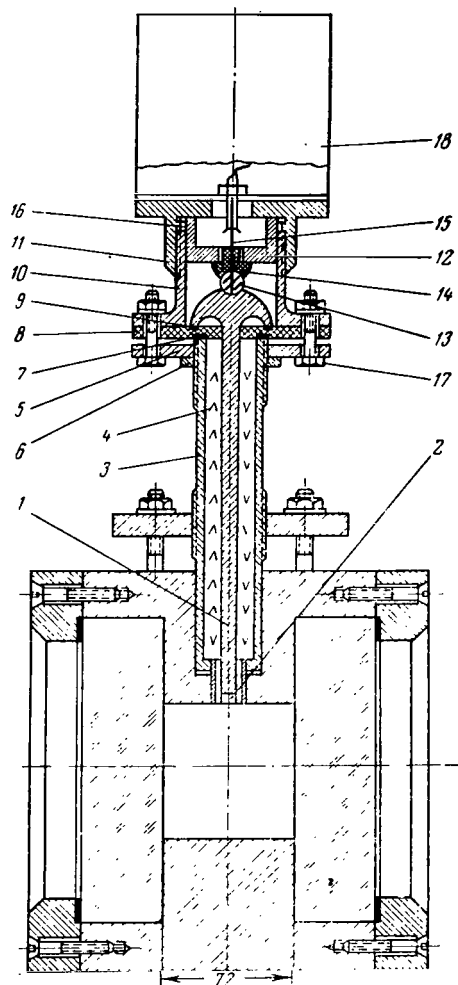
Overall View of Mushroom-Shaped Pulse-Type Pressure Transducer Together with Operating Section of Shock Tube.
